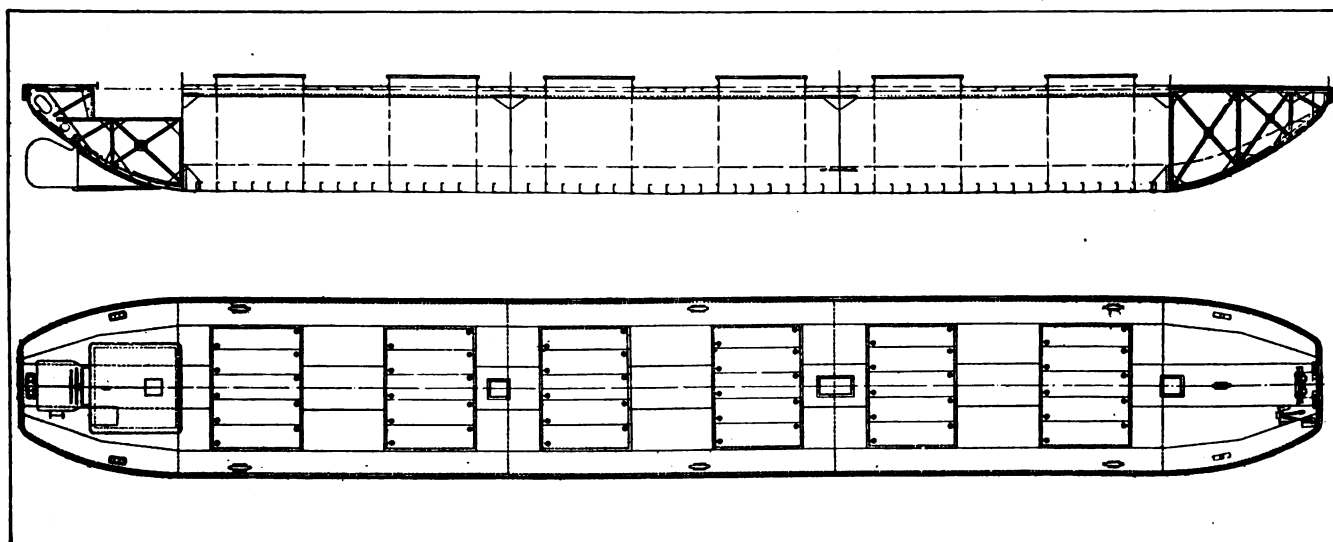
STEEL CANAL BARGE DESIGNED FOR USE ON THE NEW YORK STATE BARGE CANAL
